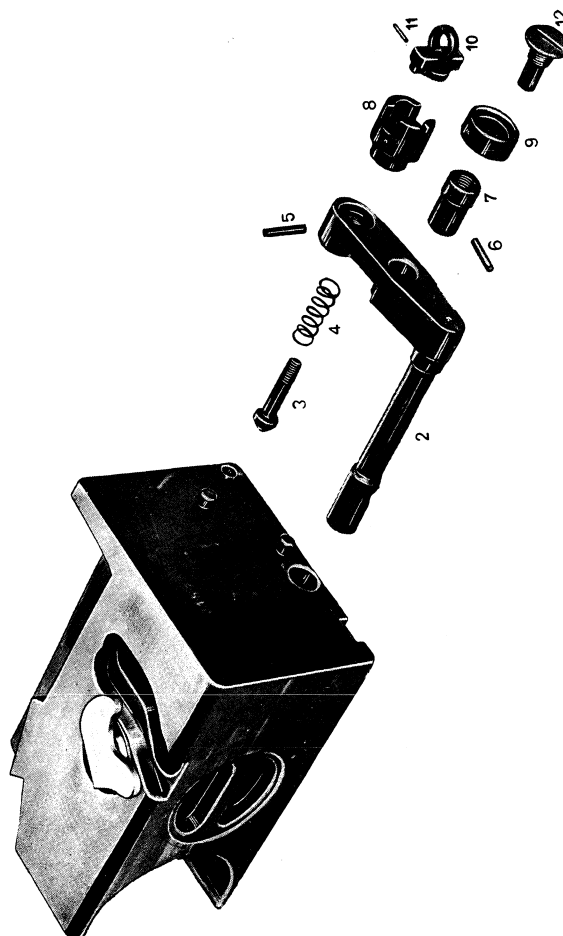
BRECHBLOCK WITH DISMANTLED TRIGGERING PARTS
